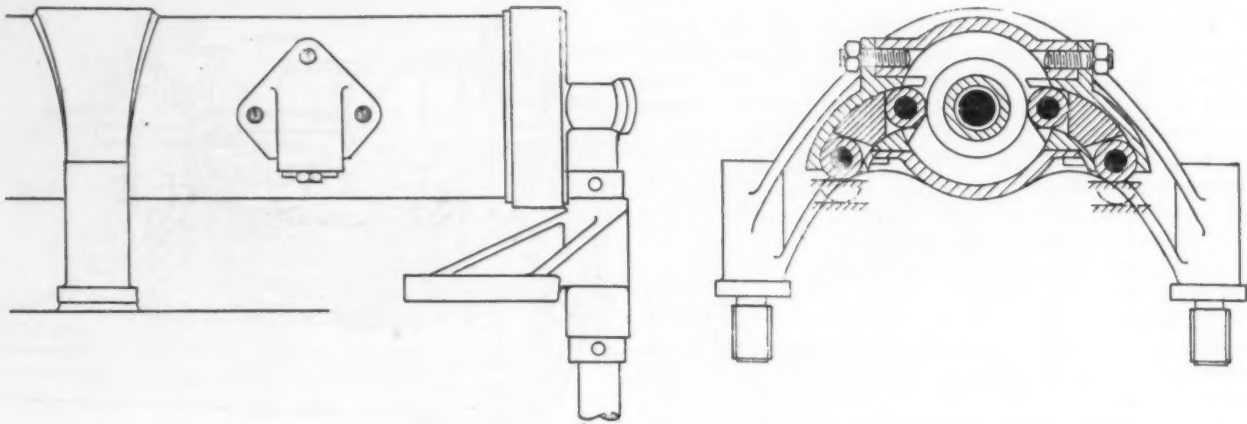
THE BUGATTI OVERHEAD VALVE GEAR WHICH IS CHARACTERIZED BY CURVED QUADRANT-SHAPED PUSH-RODS WITH ROLLERS AT BOTH ENDS
